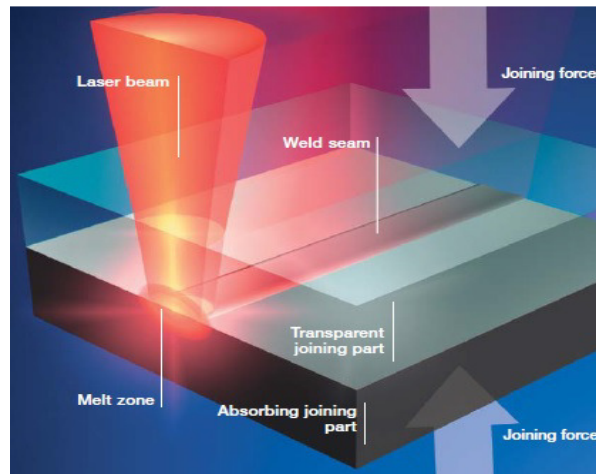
1: Laser transmission welding (Leister, 2010)
